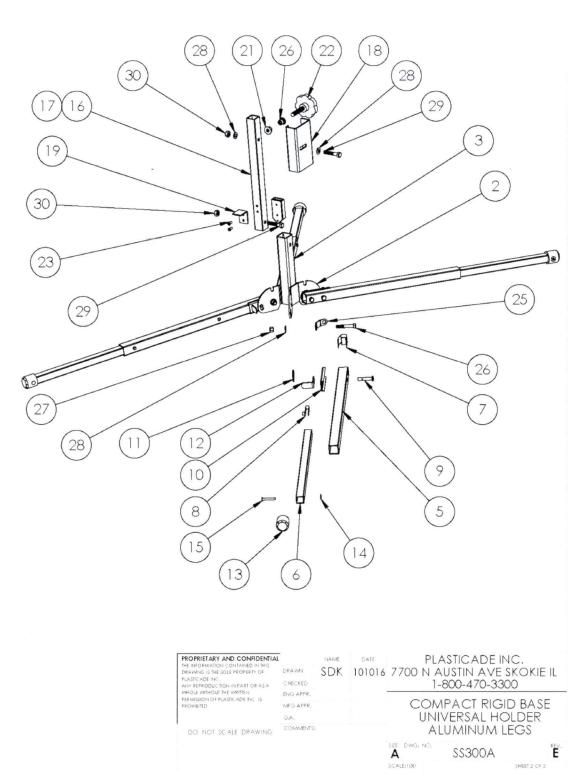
Plasticade® SS300A Technical Drawing (Sheet 2 of 3)
